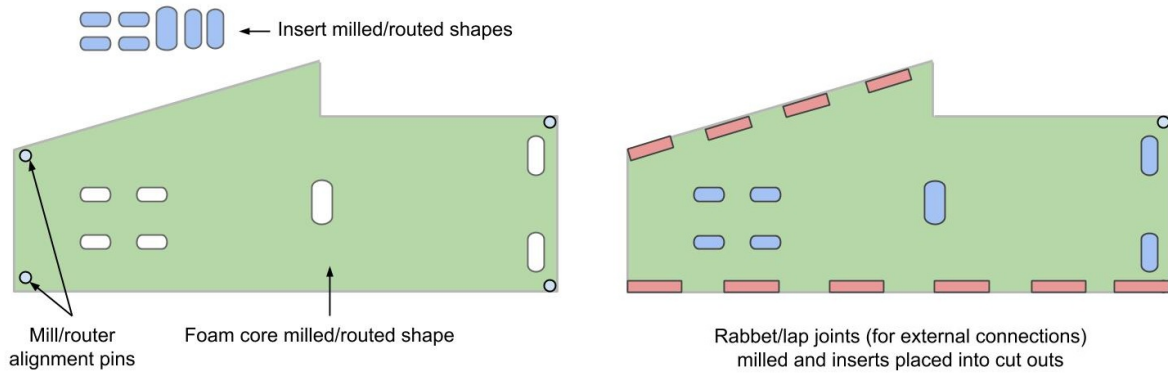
Full panel manufacturing - Part 1: Full panel manufacturing; Left - stage 2 part 1; Right - stage 2 part 2
